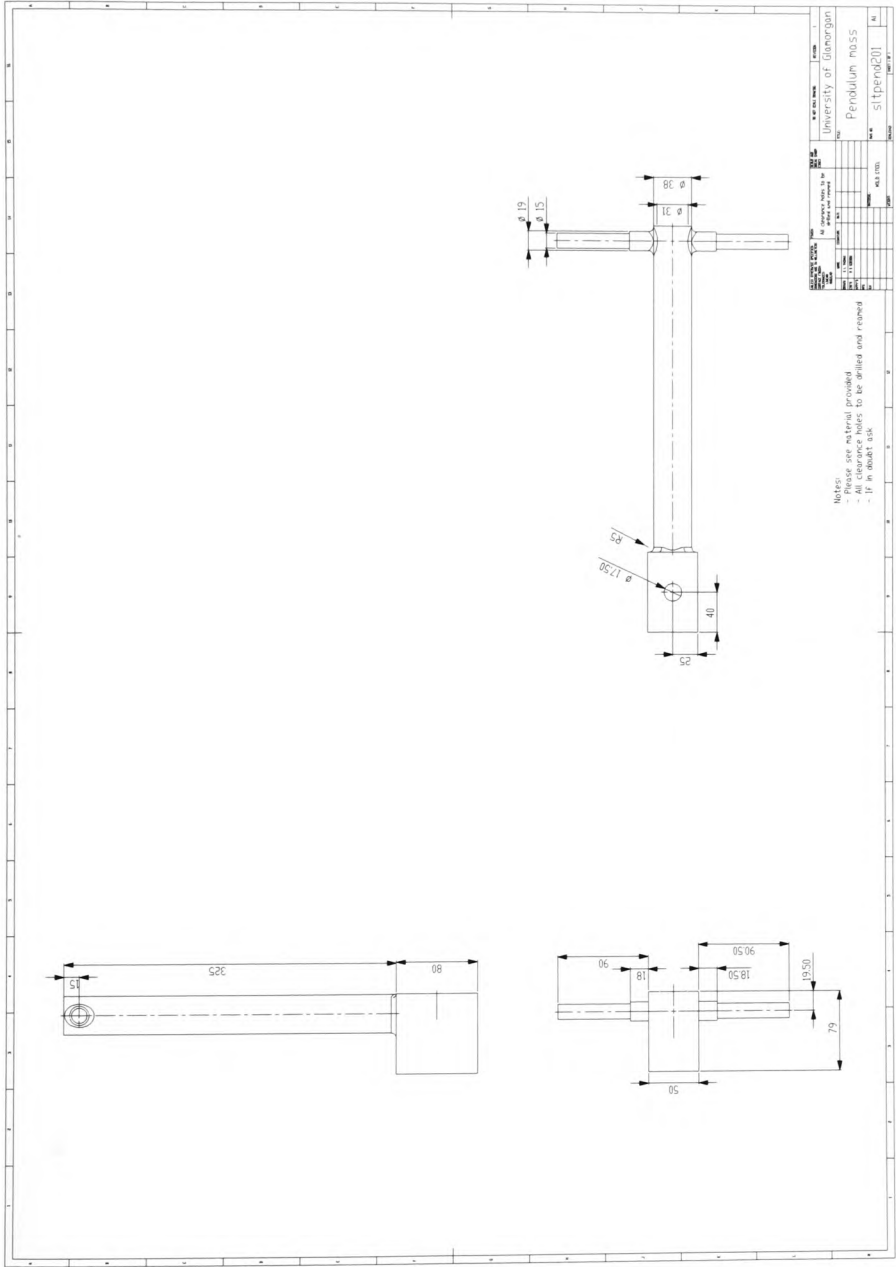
Manufacturing drawing of impact rig impactor arm
